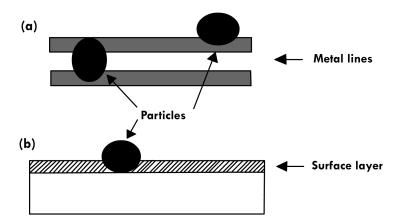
Defects between (a) metal lines and (b) on the surface of a wafer. Surface defects can affect the growth of new layers while defects between metal lines can cause electrical shorts. Adapted from *Microchip fabrication - Peter van Zant*.
